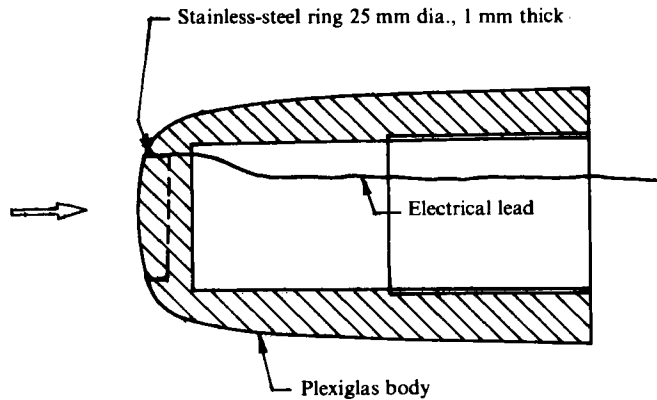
Schematic sketch showing the mounting details of the electrolysis ring.
